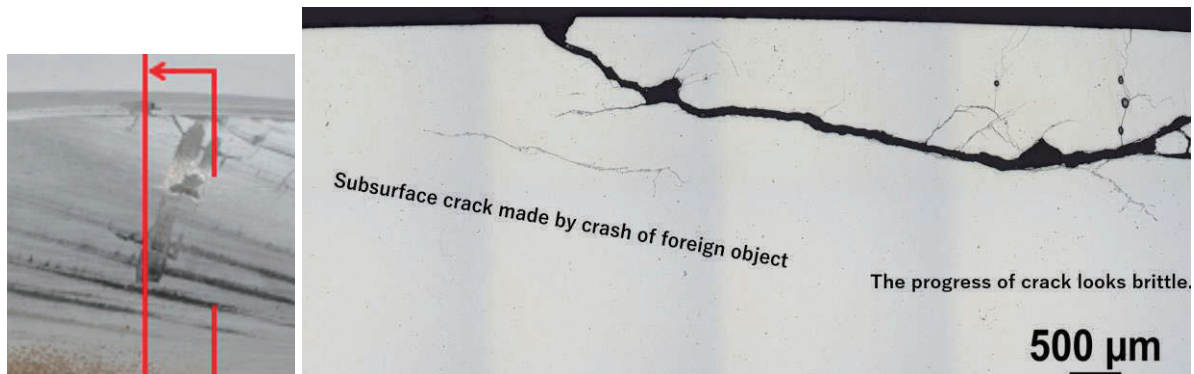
Cross-section of crash and dragged place of foreign object. Subsurface brittle cracks exist.
